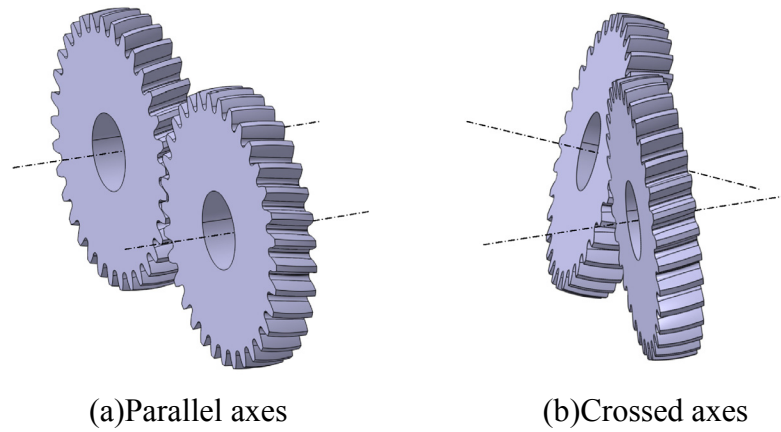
Two axes mounting modes of the spherical helical gear sets
